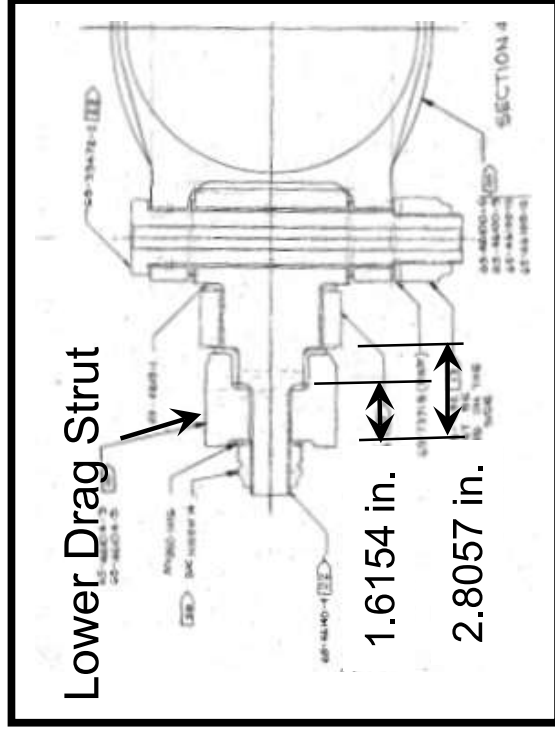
Overall view of Lower Drag Strut- Tee Bolt Bore Depths..
